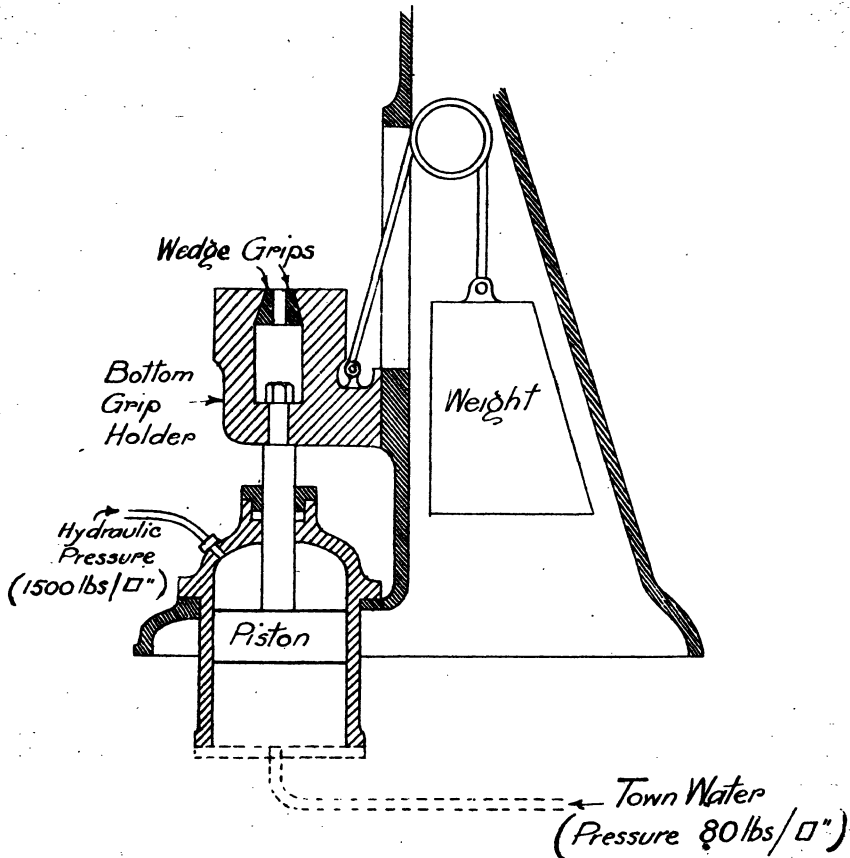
Straining Gear of Hydraulic Testing Machine. Capacity 20 tons.
